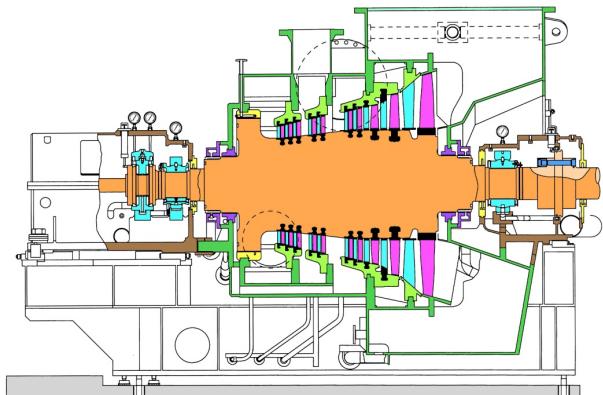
Sectional drawing of Svartsengi Unit 5 turbine.
